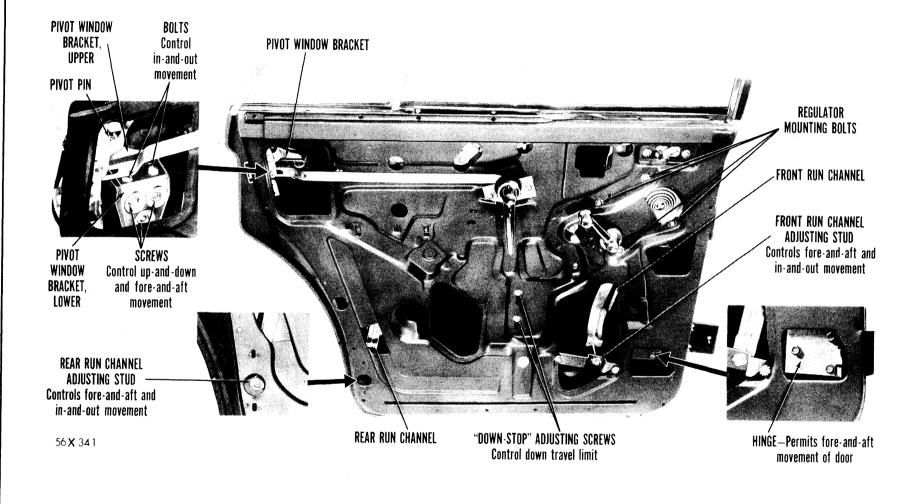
Rear Door, Front Window and Pivot Window (Cutaway View)
